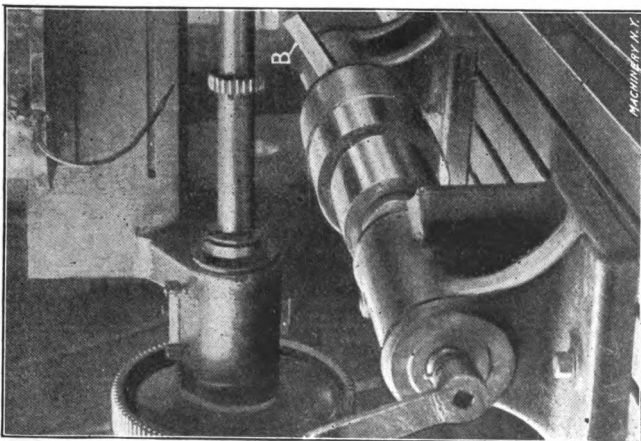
Keyseating the Crankpin in the Horizontal Miller
